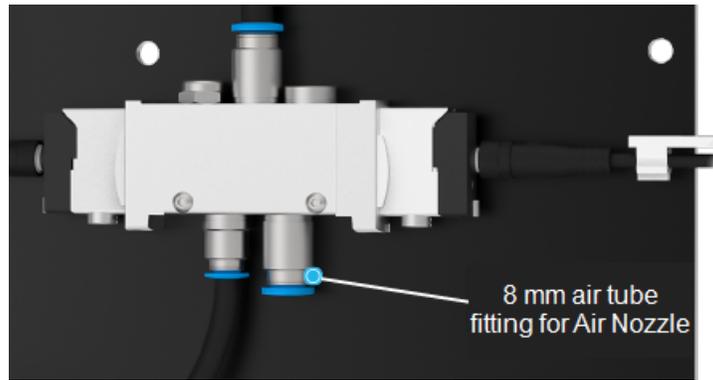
Air tube fitting for Air Nozzle on pneumatic panel
